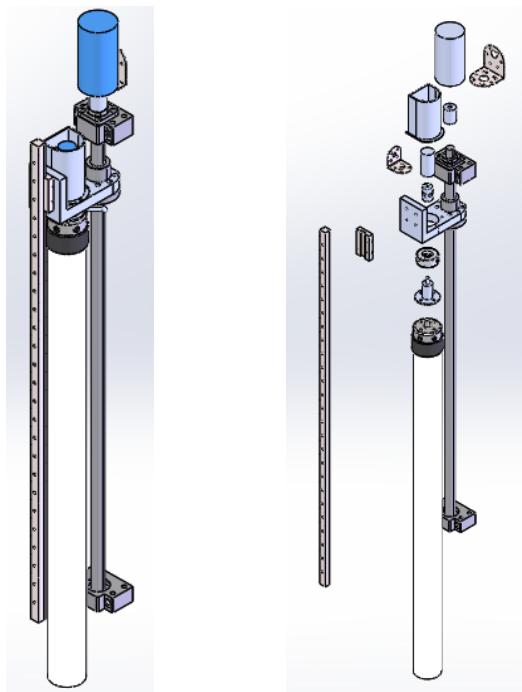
Left: Updated actuation unit. The motors are highlighted in blue. Right: Exploded view of actuation unit. The linear guide rail, slider, ball screw, motors, motor mounts, couplers, bearing, and drill head assembly and connection pieces are shown above.
